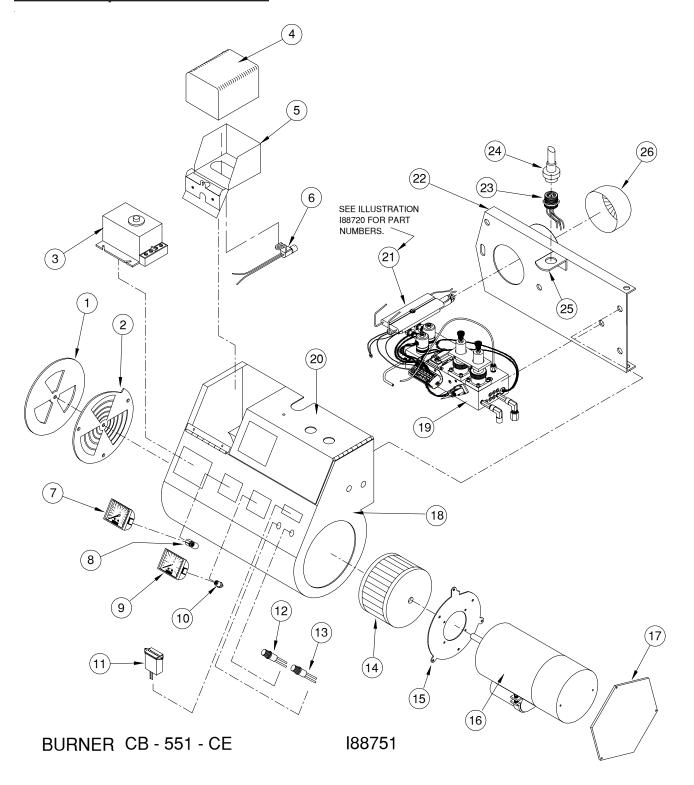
CB-551-CE Burner Component Detail (CB-350-CTB)
